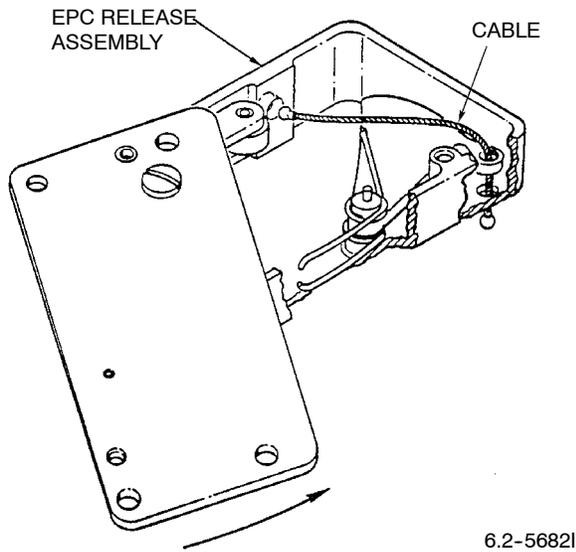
Pass Small End of Cable thru Lower Right Hand Hole
